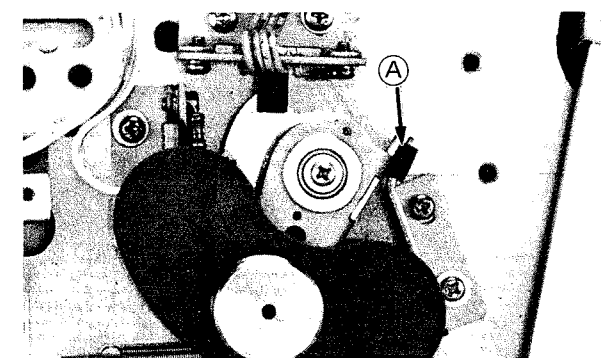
Adjustment Position of the End Sensor Ass'y
